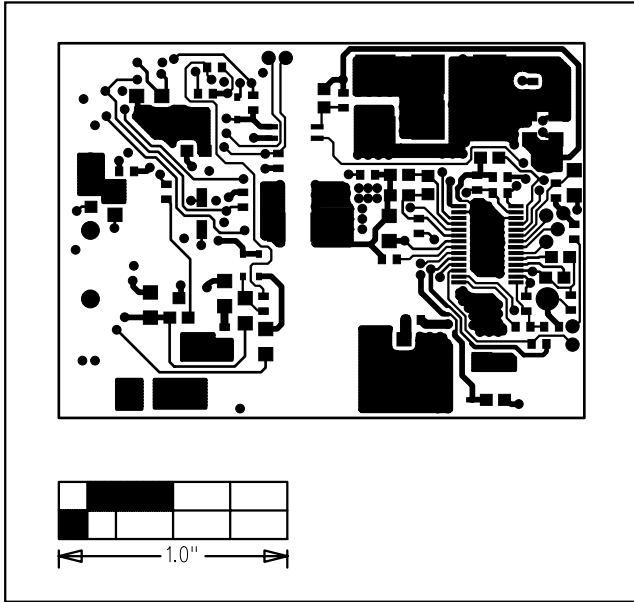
MAX5058 EV Kit PC Board Layout—Solder Side
